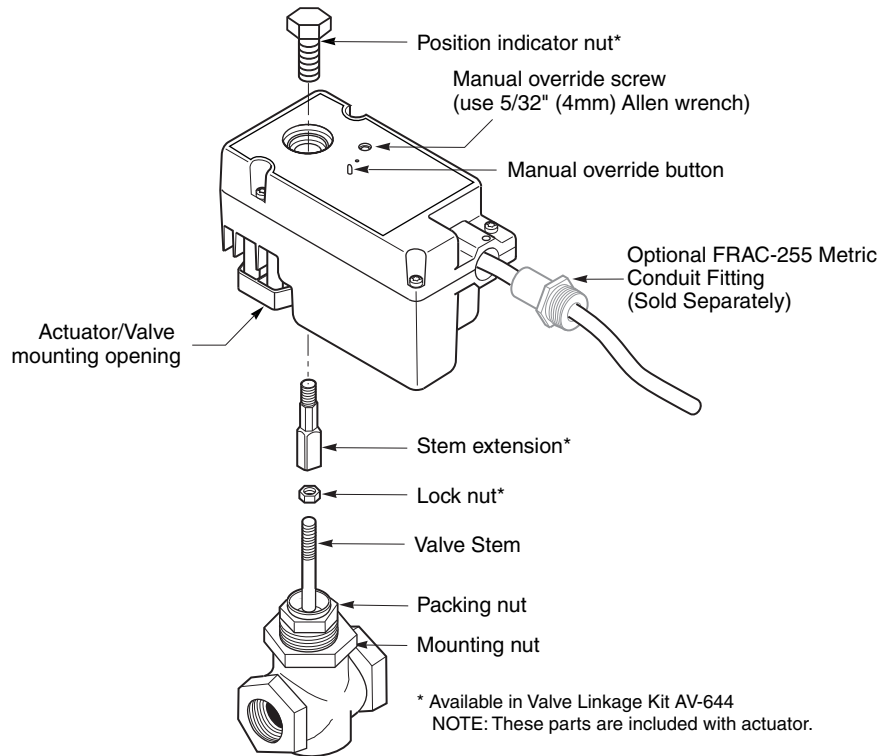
MF-2xxx3 Series and MS-22353 Actuator Assembly Diagram.
